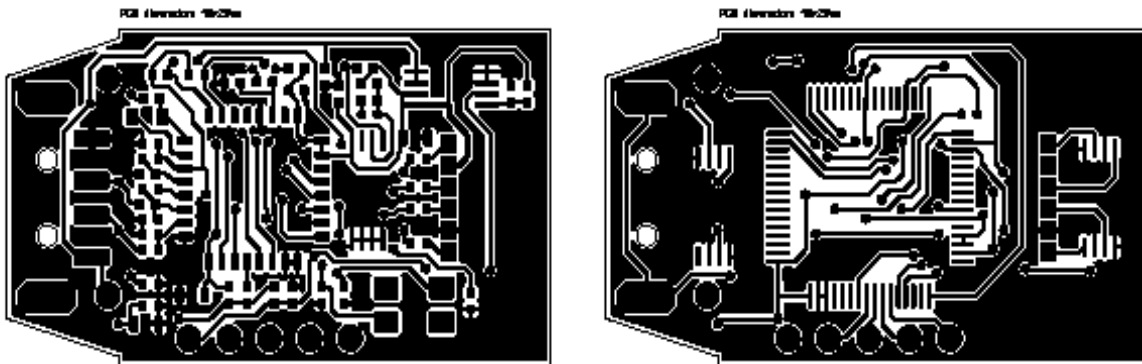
eZ430-RF, USB Debugger, PCB Layout
